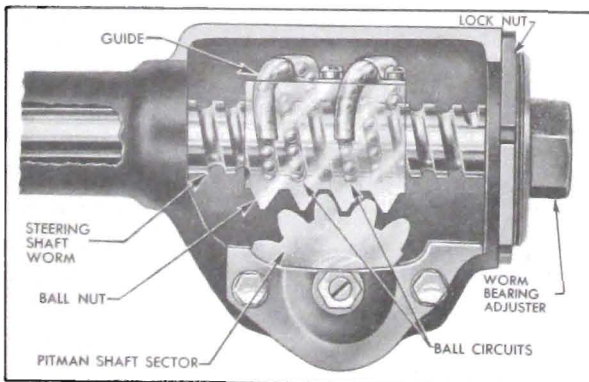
Steering Gear Worm and Nut, Showing Ball Circuits
